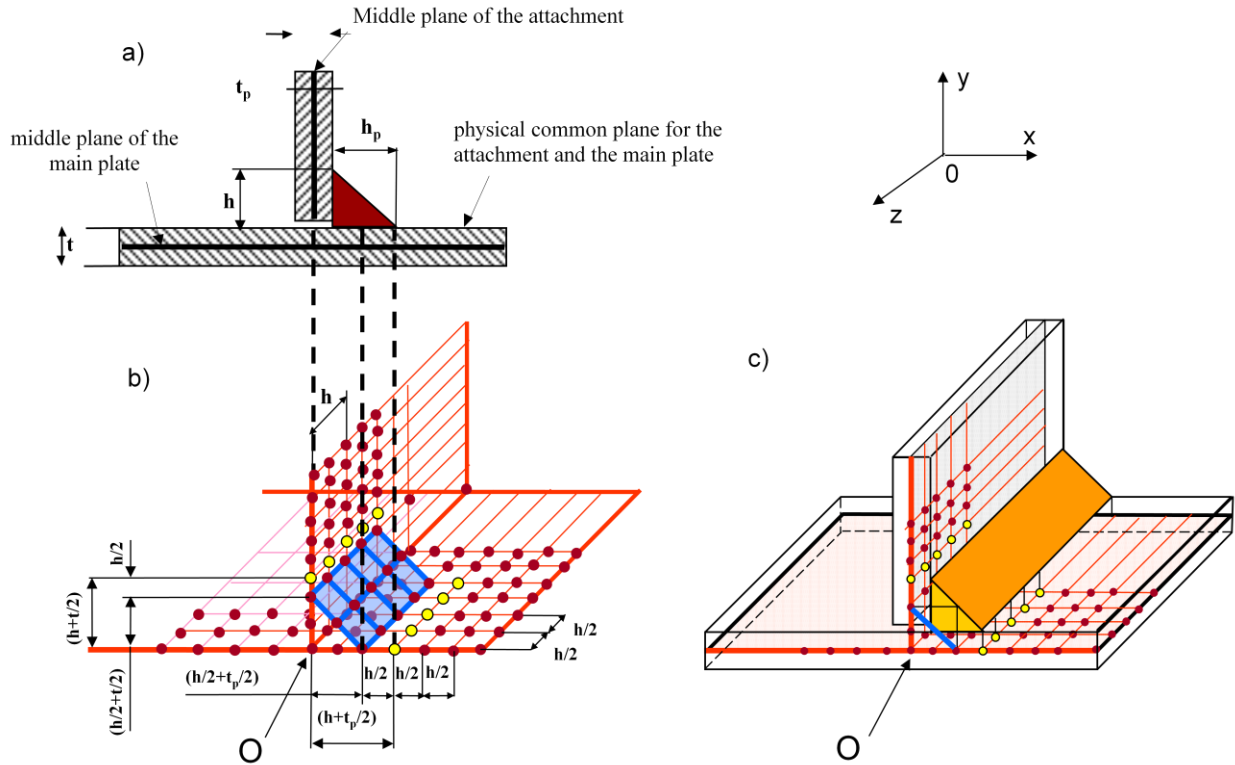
A welded joint and its simple shell finite element model: (a) welded joint and stress distribution in critical cross sections; (b) shell finite element model and resultant stress distribution; (c) superposition of the actual welded joint and its shell finite element model
